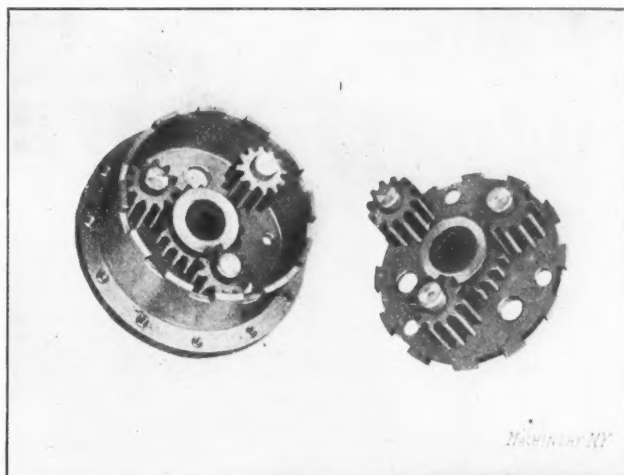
A Small Size of Equalizing Gear Dismantled to show Construction
